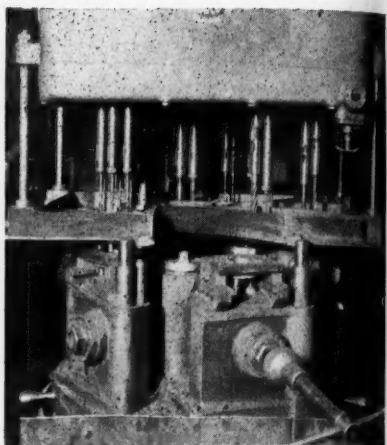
Twelve holes are drilled and six are spotfaced in the cylinder bearing plate in machine.
